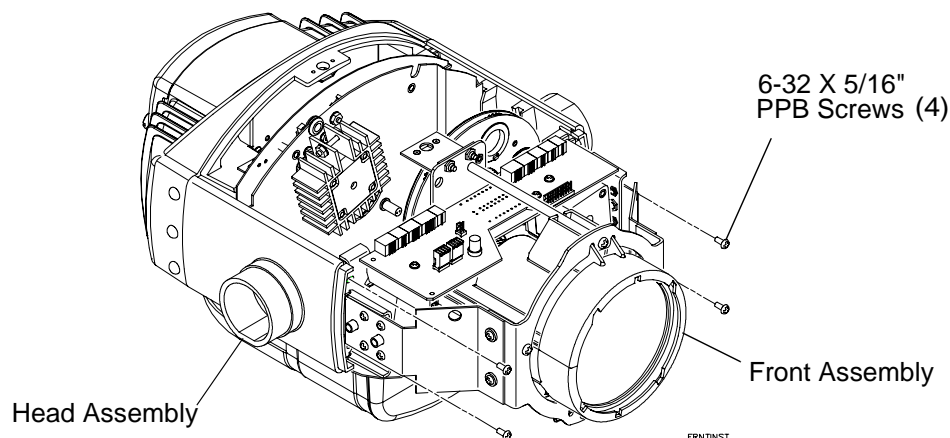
VL6B/VL6C Luminaire Front Assembly Replacement
